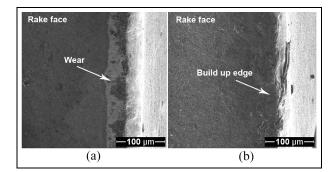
Rake face of tools after machining: (a) tool grade TH1000 and (b) tool grade CP500.
